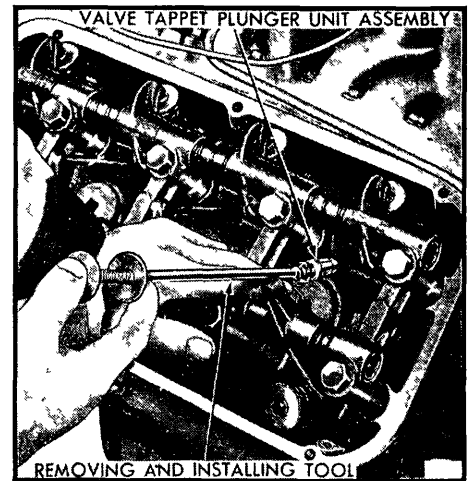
Chrysler and De Soto V8, 1951-52. Removing valve lifter with special tool
